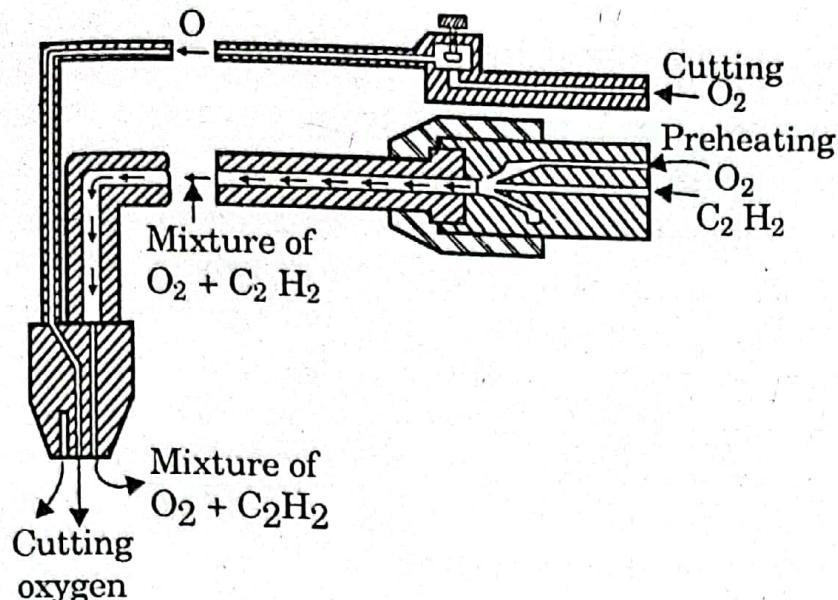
Cross-section through an oxy-acetylene cutting blowpipe.
